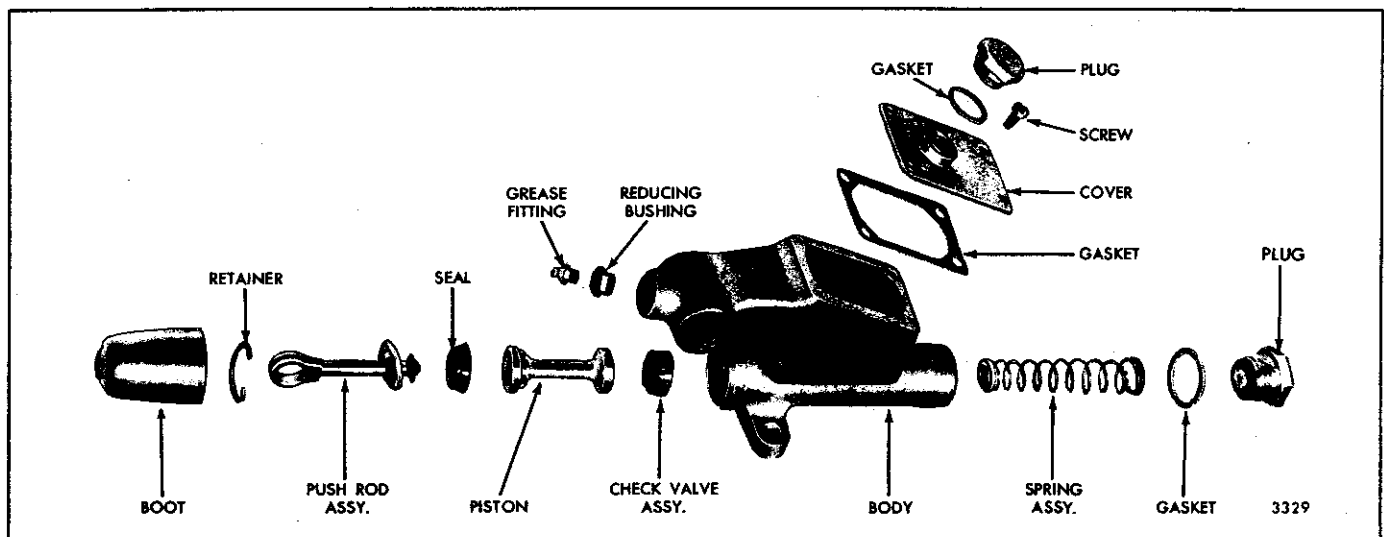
Hydraulic Starter Remote Control Master Cylinder Details and Relative Location of Parts
